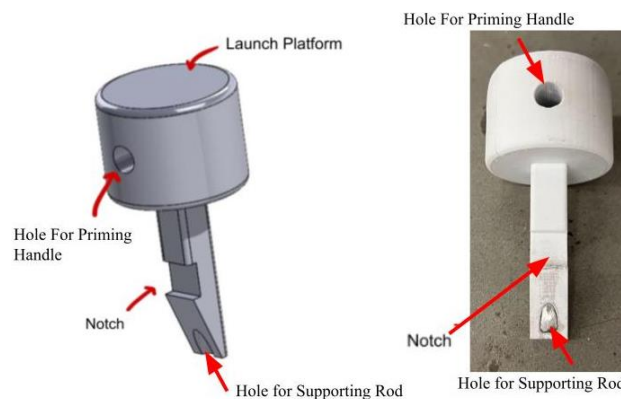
Launch Platform Solidworks Model (left) 3D Printed Part (right)
